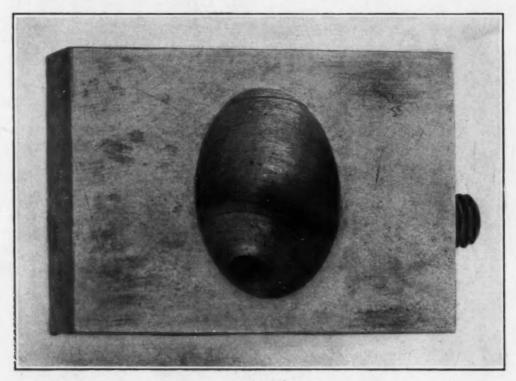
Jig for Holding Round Bar to Cut Specimen to Shape and for Face Grinding After Quenching.
